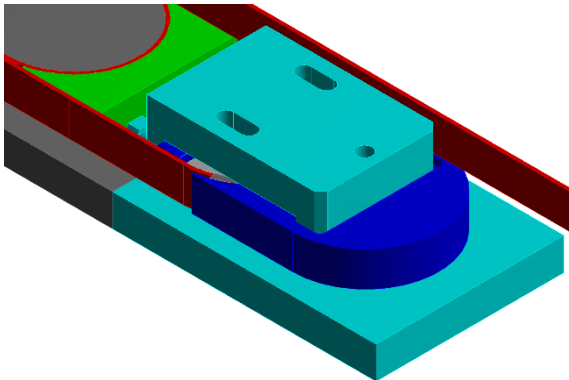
The screws between connecting and pressing plates are removed and full pressure can be applied.
